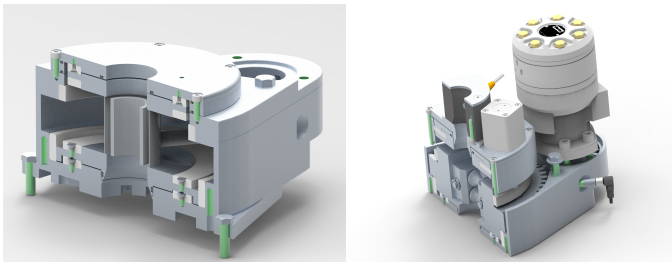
Two previous versions of the Raptor. On the left the version with the bellows. On the right the version with the clamping blocks.
